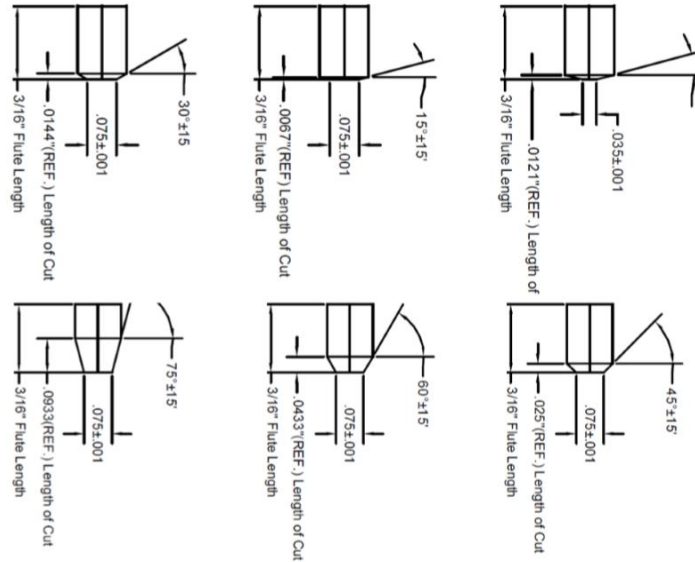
Endmill Geometry Used to Create Machined Indents
